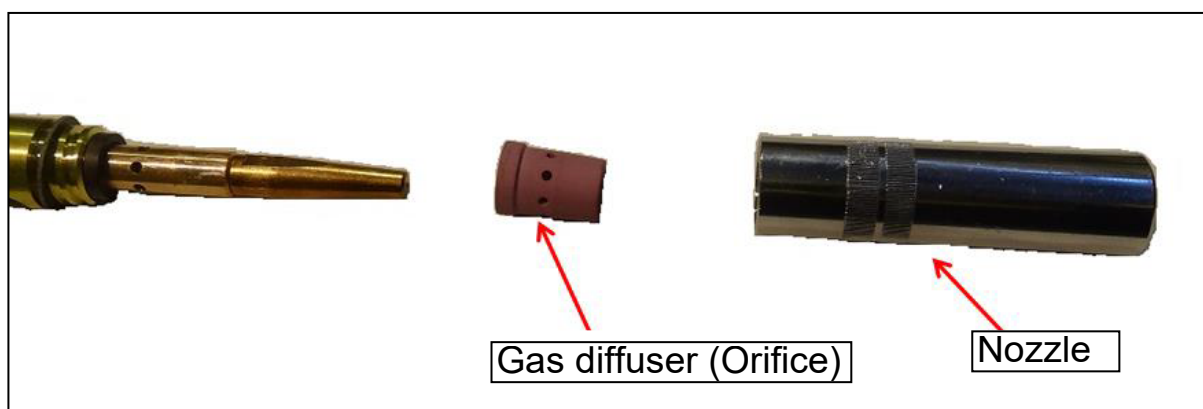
(a) Removing the gas diffuser and the nozzle
